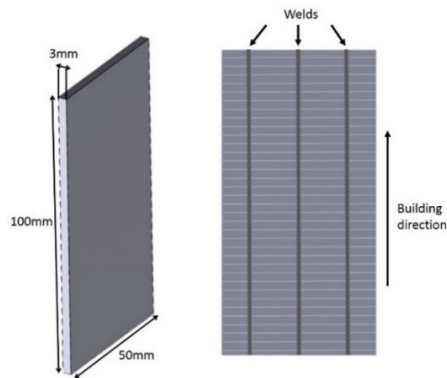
Left: dimensions of the test pieces, Right: building and welding direction of PBF test pieces.
